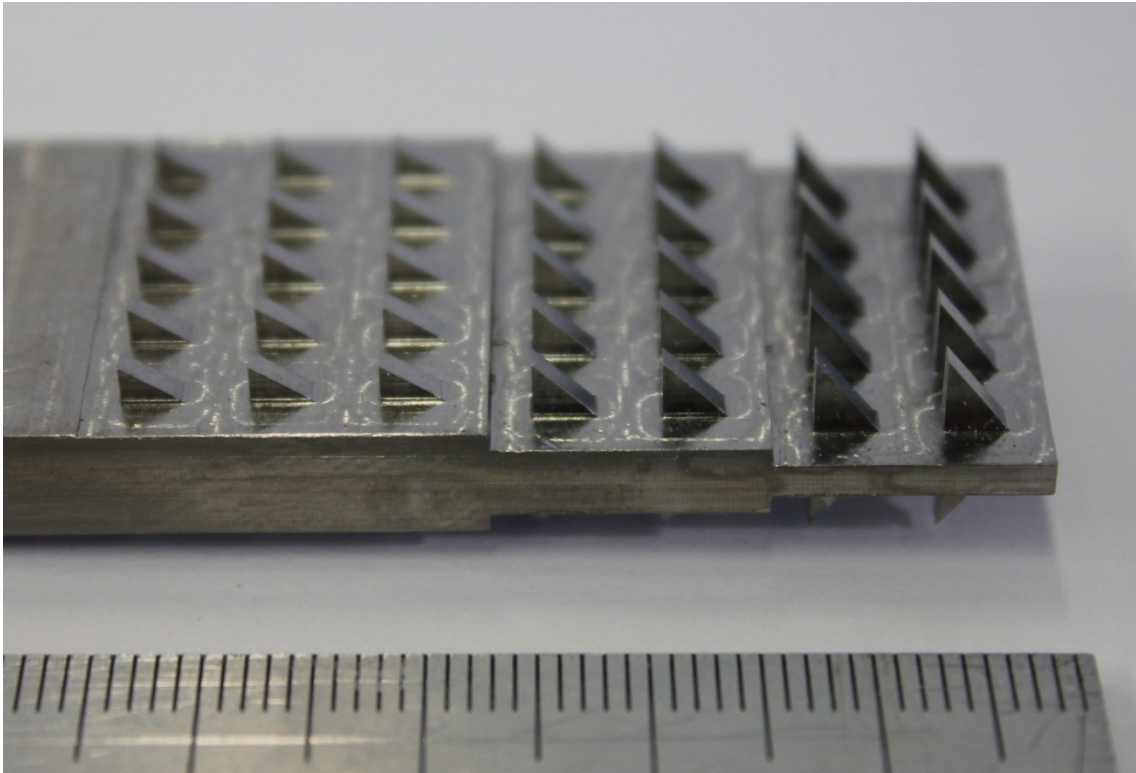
Details of double-stepped joint with shark teeth shape pins
